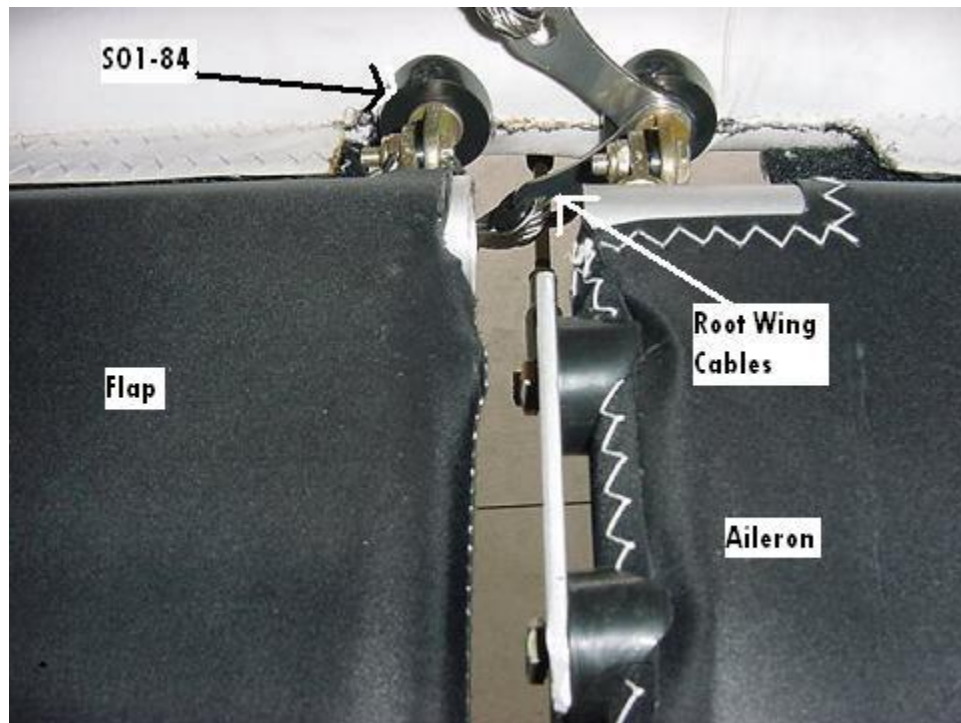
Inner Wing Cable Attachment Point Eyebolt and Saddle Arrangement
